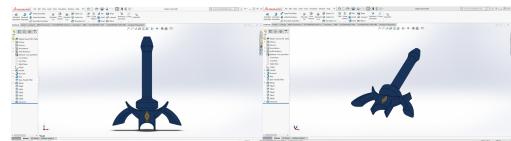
Master Sword hilt Solidworks CAD model in isometric view and front view
